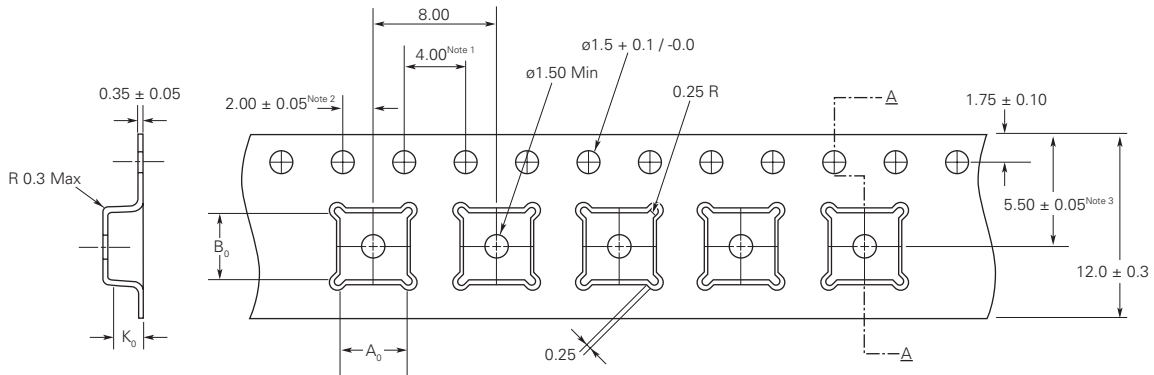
EIA Referenced Taped Component Dimensions for PolyZen Devices in Millimeters (mm)
